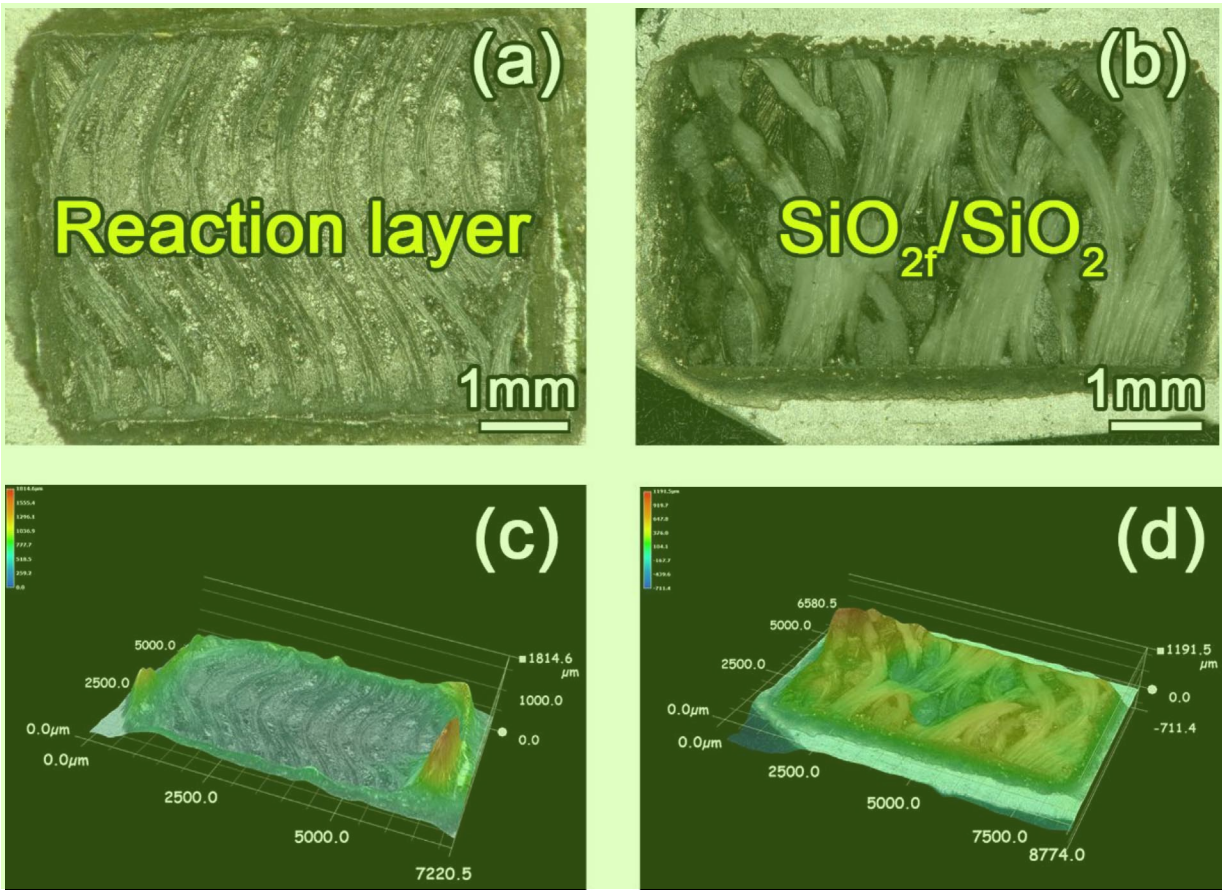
Fracture morphologies, LSCM images and fracture schematic of the joints brazed with (a), (c) AgCu-4.5Ti and (b), (d) composite interlayer with a 70  $\mu\text{m}$  tungsten foil. 2
